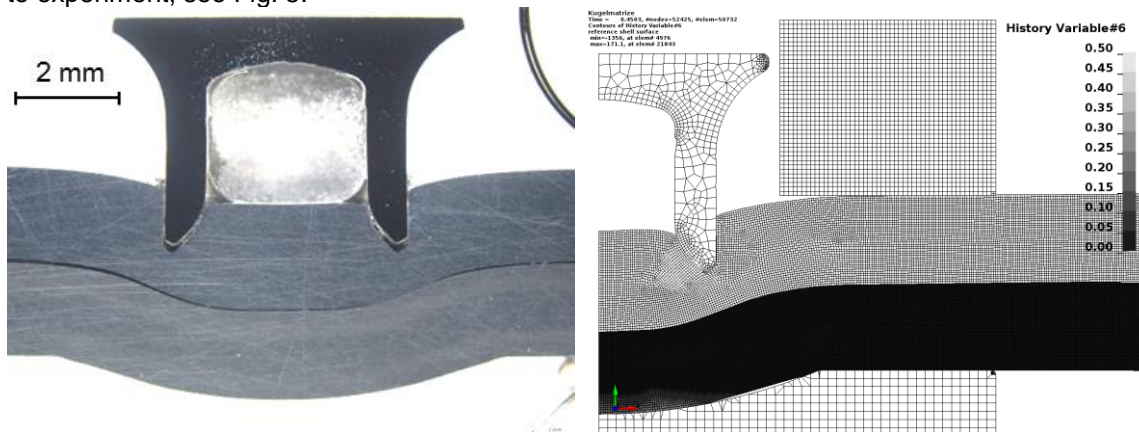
SPR joint with flat ball-shaped die. Left: Cross section showing no cracks, right: Damage values of the model in the aluminum die casting with comparable rivet position without crack.
